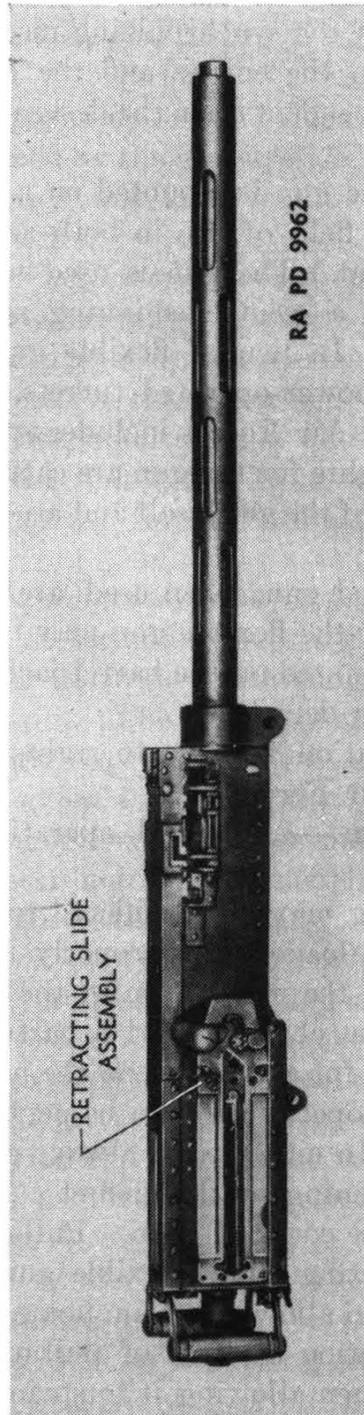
Browning machine gun, caliber .50, M2, aircraft, flexible—right side view, with spade grip back plate.
